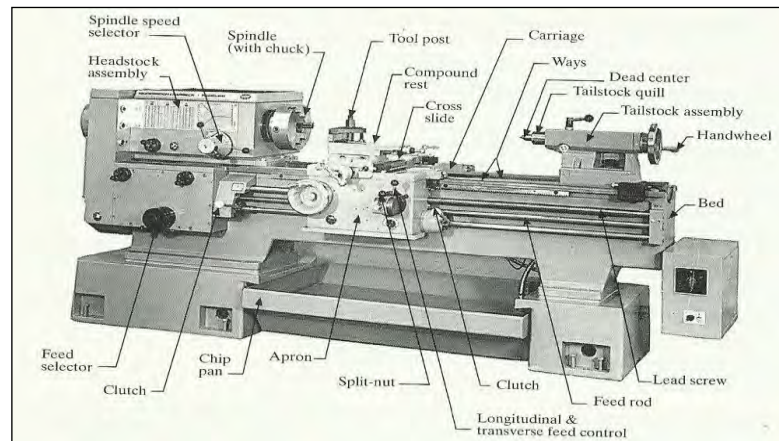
Typical parts in lathe machine (Atul et al, 2011)
